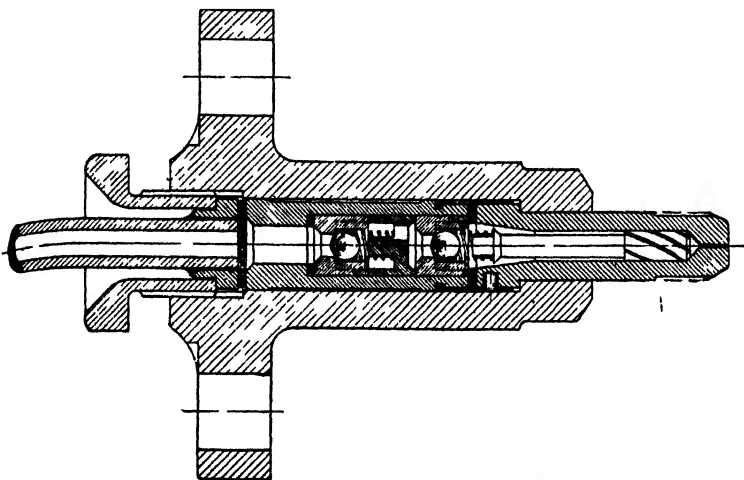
Check-valve, or open-type, fuel-spray valve.
